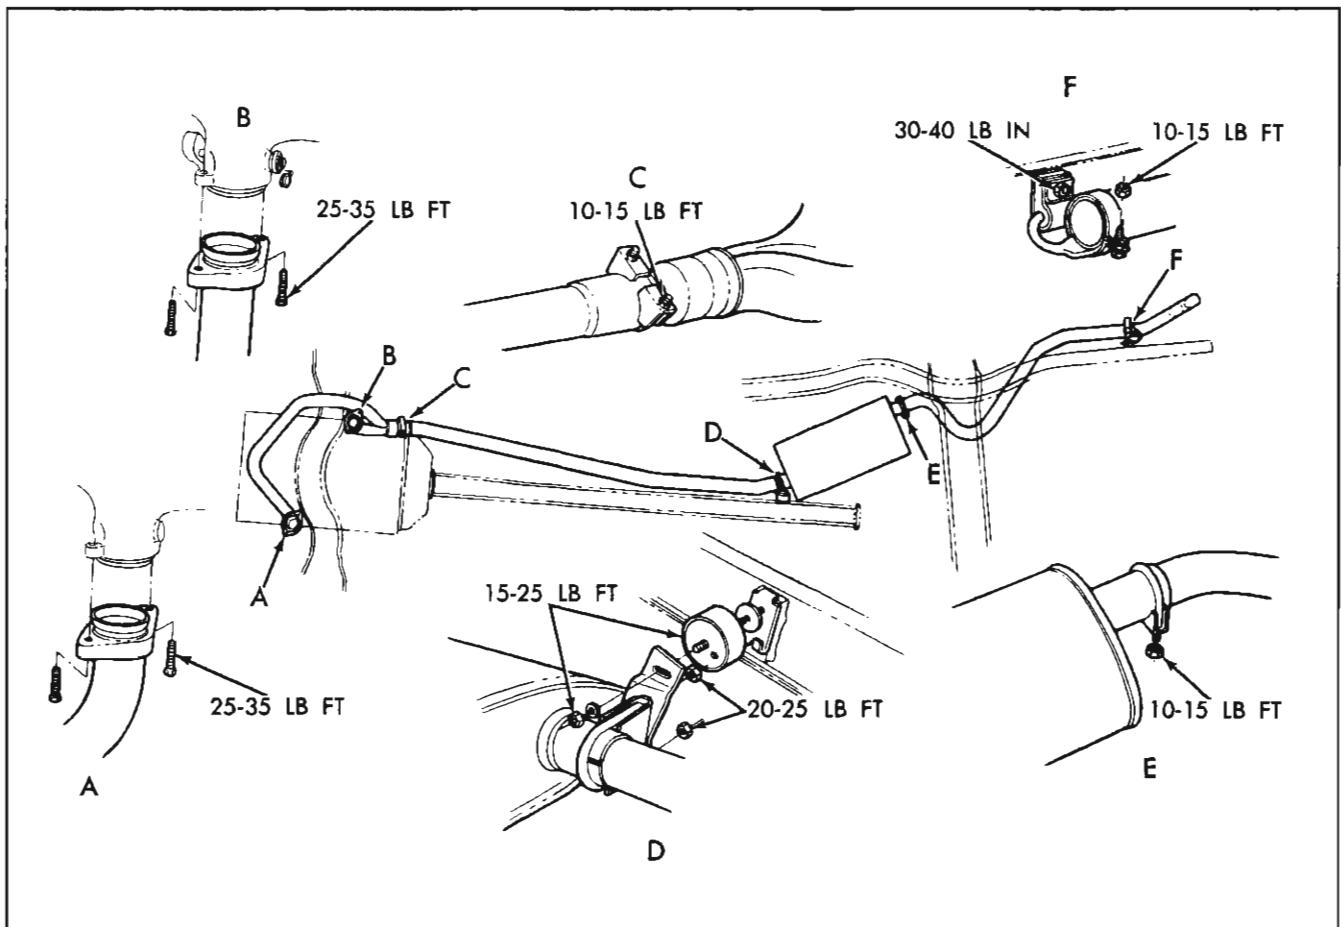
Exhaust System—Eight Cylinder Engine
